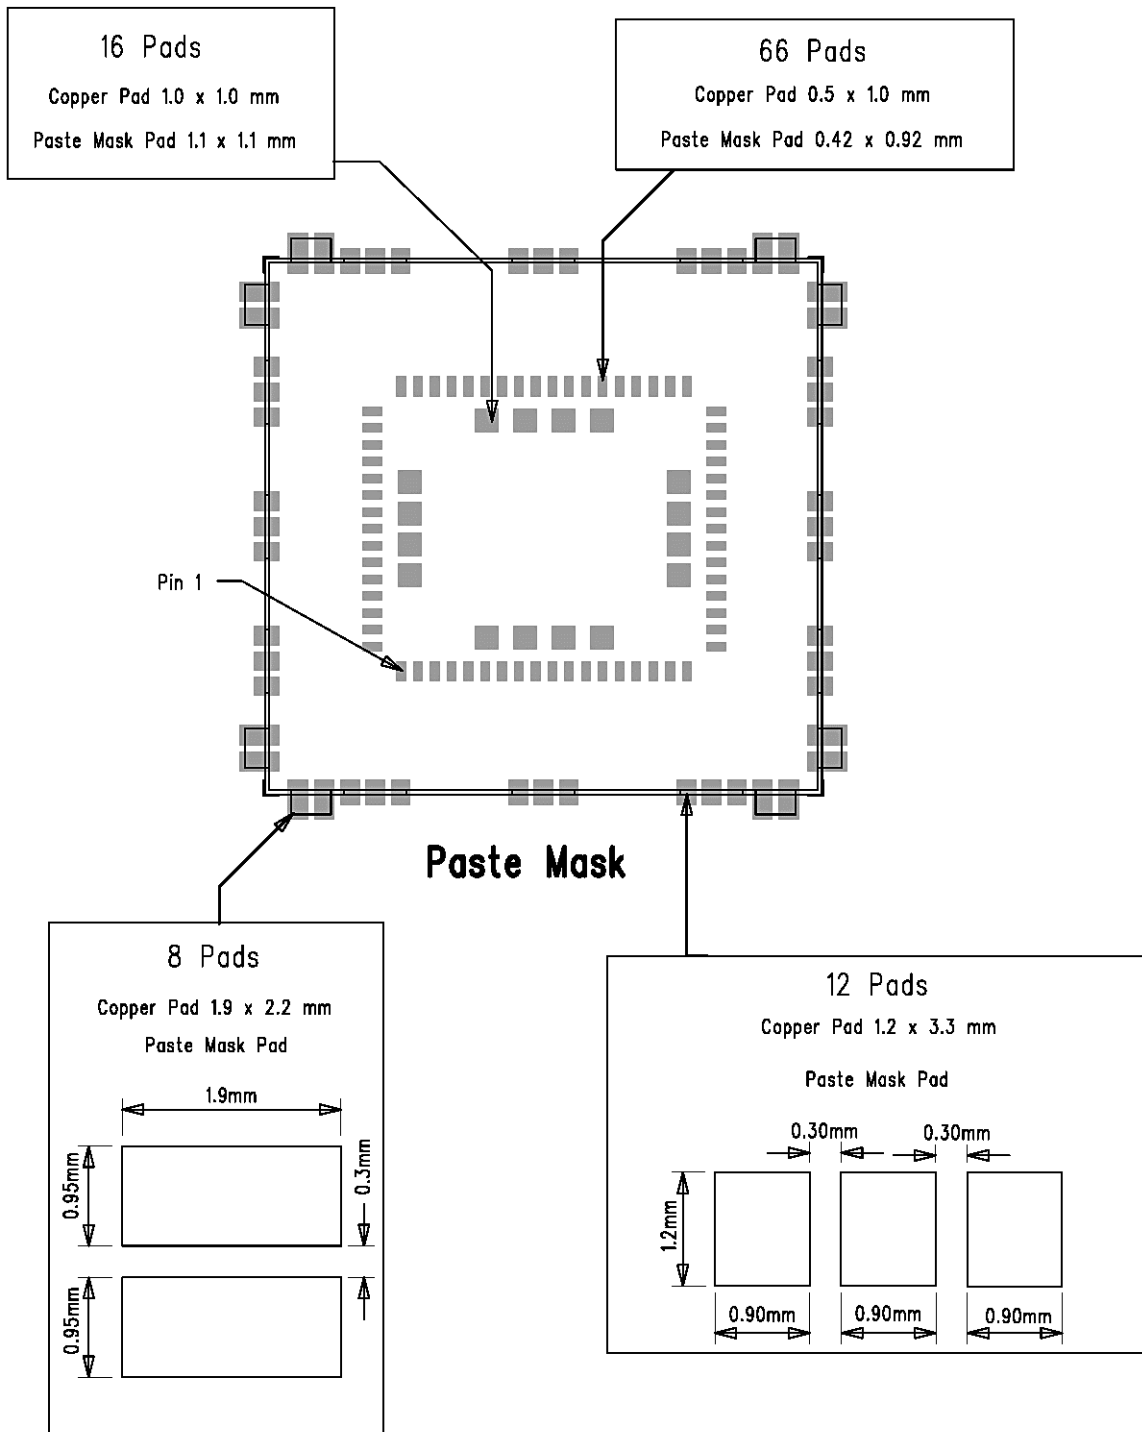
Recommended HL Series Snap-in Socket Footprint – Paste Mask Layout
